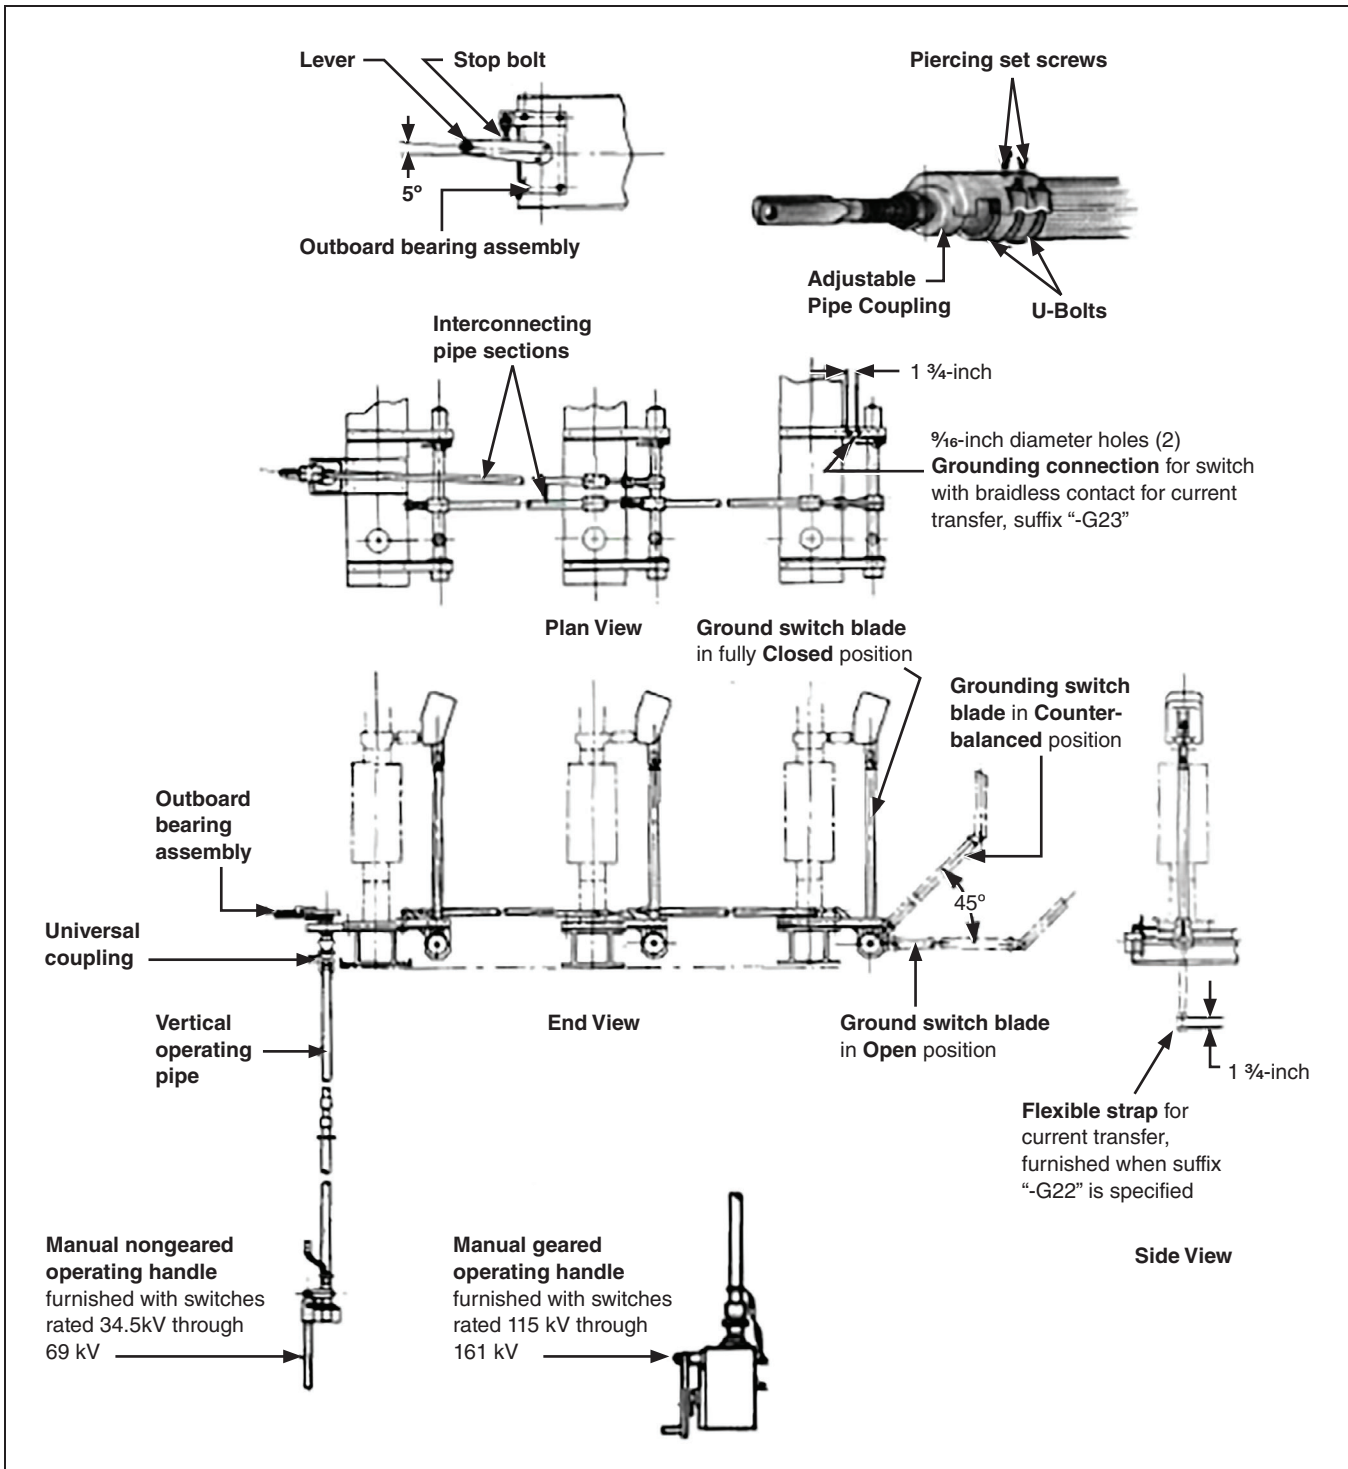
Typical three-pole configuration. Mount the outboard bearing assembly in the position shown on the erection drawing.
